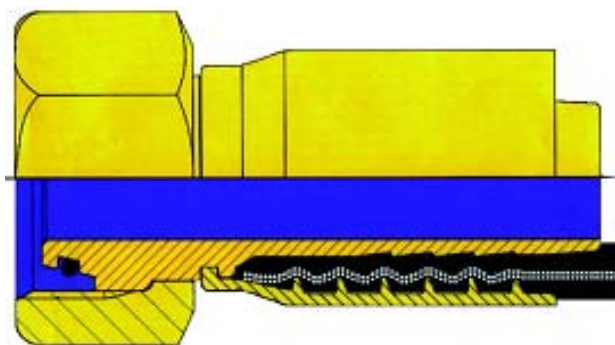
A one piece fitting assembled onto a 'no skive' hose. Note the longer teeth on the ferrule due to the fact that they have to pass through the outer rubber hose cover before contacting the reinforcement
